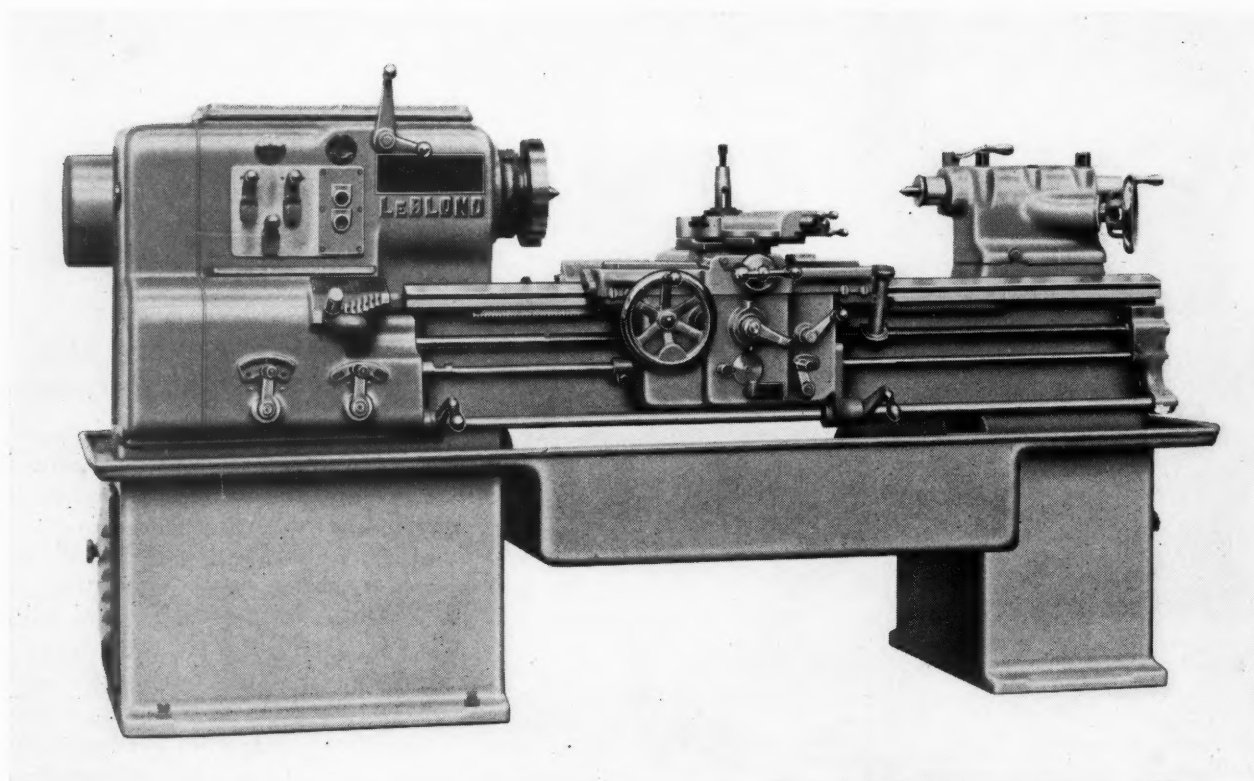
Heavy-duty engine lathe built by the R. K. LeBlond Machine Tool Co.
